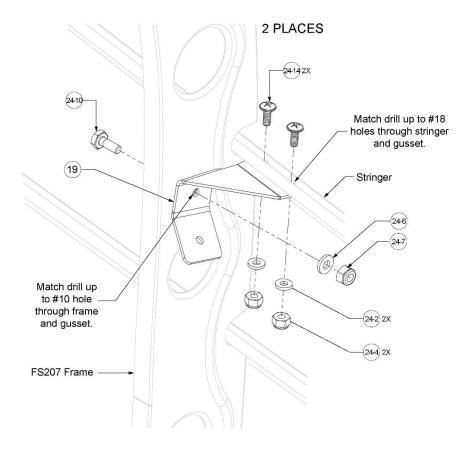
Attaching Gussets to Frame and Stringers (Right Side Shown)
